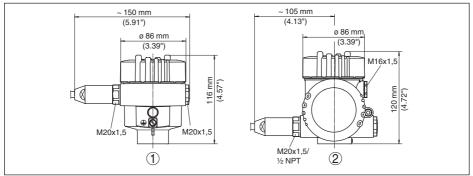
Housing version with protection rating IP 66/IP 68 (1 bar) - with integrated display and adjustment module the housing is 9 mm/0.35 in higher
